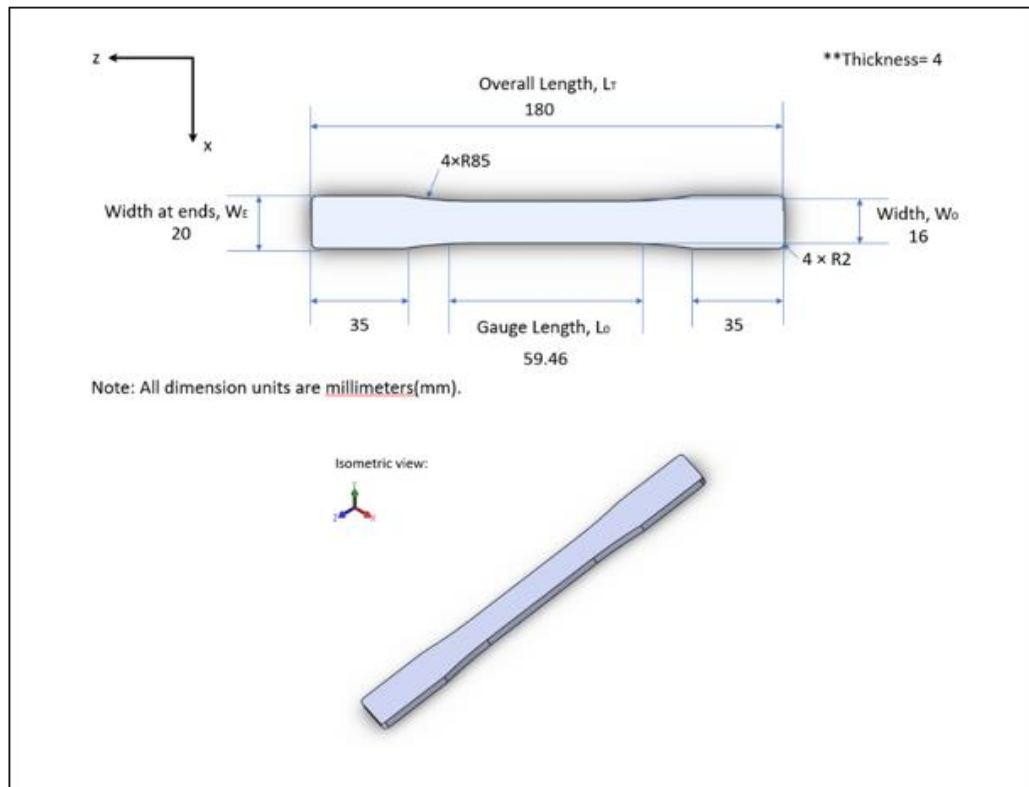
Schematic Drawing of Tensile Test Specimen
